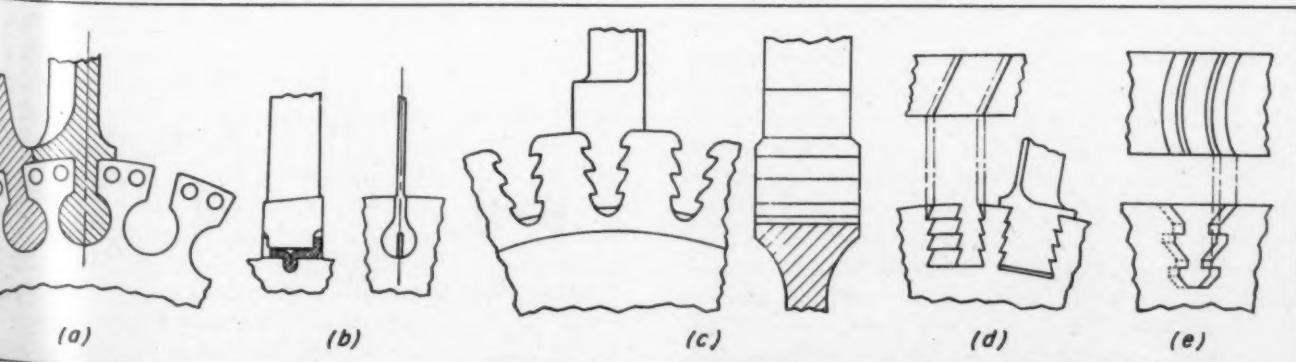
Inverted pine-tree, dovetail and other rotor-grooved fastenings. Despite machining difficulties, many steam turbines have employed intricate grooving in the rotor, as shown by some of the designs in this group. With the advent of higher steam pressures, design (a) with end tightening was adopted by Parsons in preference to the radial tightening arrangement of Fig. 1a. The bucket, of drawn bar stock, is silver-soldered to the grooved spacer. Inserted from the end of a bucket section, the packing piece is driven into position around the rotor rim. For added strength with long buckets running at high
